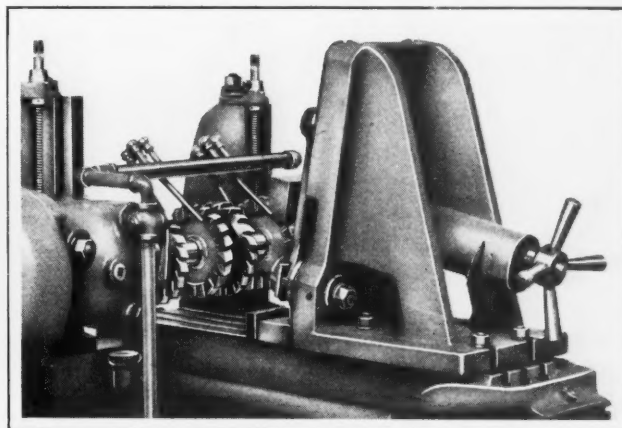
View of Milling Cutters Employed with Fixture Shown in Fig. 3
